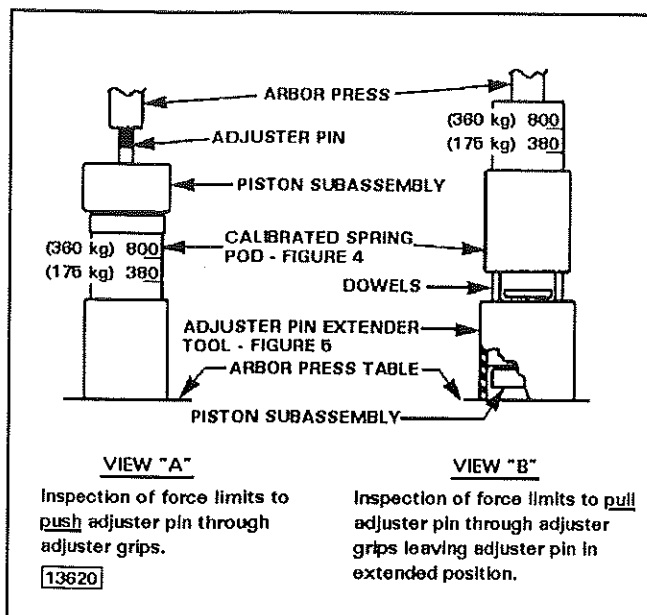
CHECKING ADJUSTER GRIP SPRING FORCE
